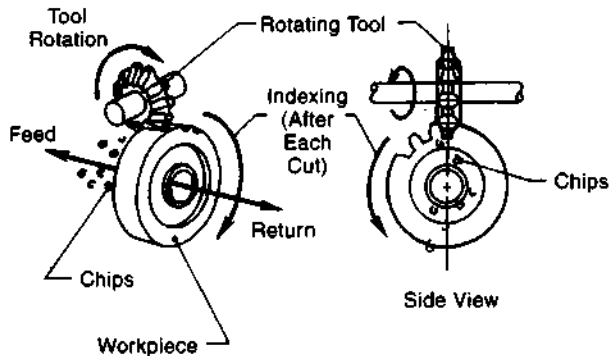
Gear milling a simple spur gear. The form milling cutter machines one gear tooth at a time as it feeds across the gear blank. (From Todd, Allen and Alting, *Manufacturing Processes Reference Guide*, Industrial Press, 1994.)
